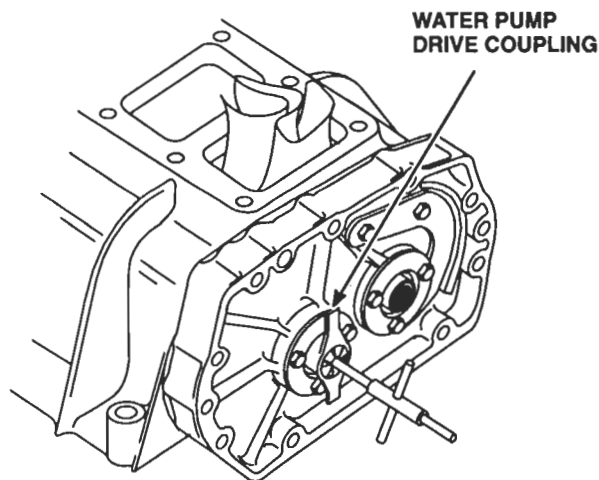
Removing Water Pump Drive Coupling Bolt from Blower Rotor Shafts
